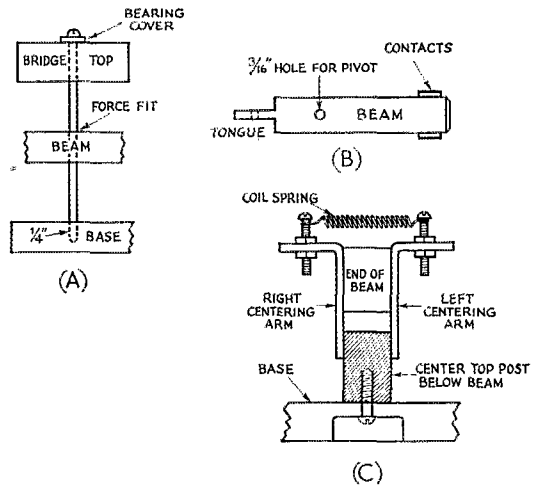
Sketches showing several details of the sideswiper construction. These drawings are not to scale.
